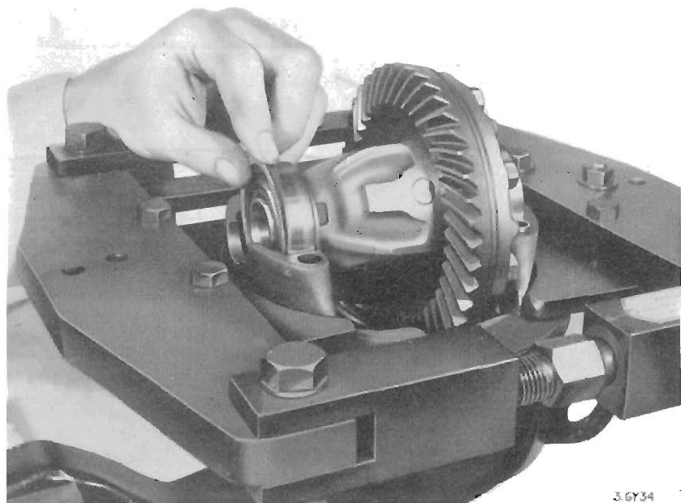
Using a Churchill spreading tool to release the differential carrier
